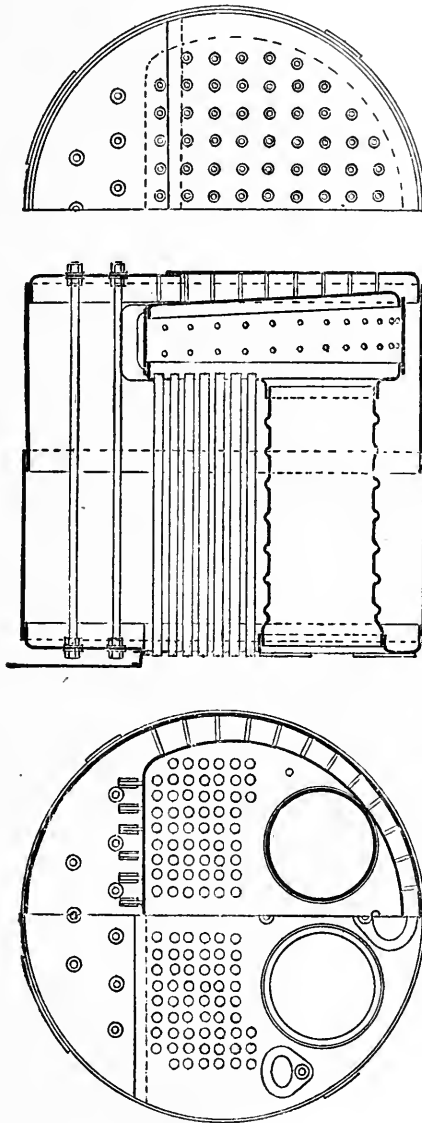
Single-ended Cylindrical Boiler with Two Furnaces and One Combustion Chamber.
